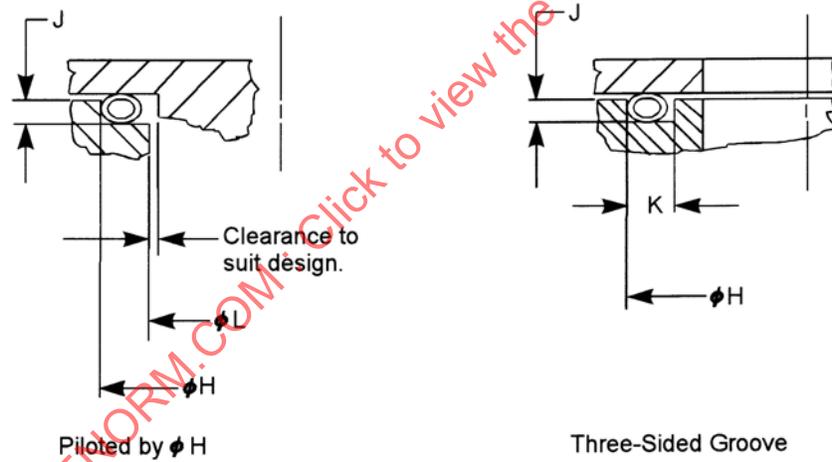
Type 2, Three-Plane Contact Grooves
